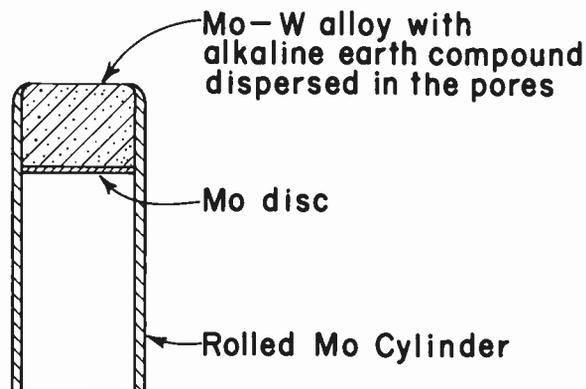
Sectional view of pressed emitter in a molybdenum cylinder.
